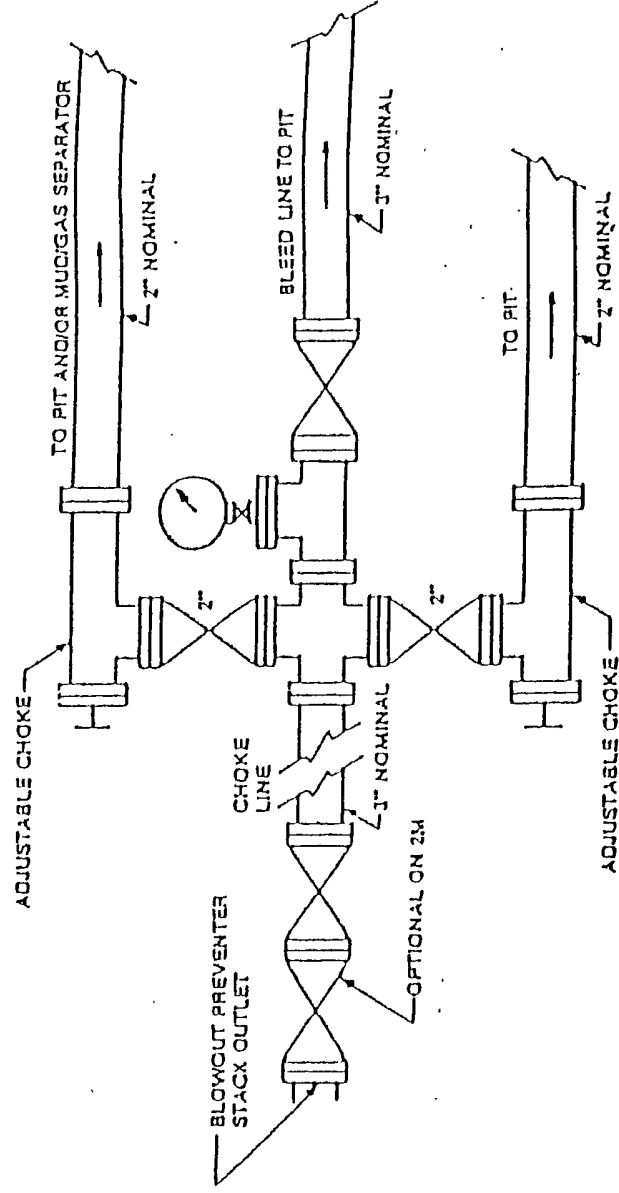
Typical choke manifold assembly for 2M and 3M rated working pressure service — surface installation.
